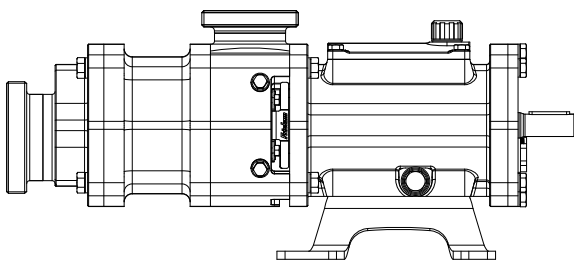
Incomplete machine: Pump without motor, coupling and base frame
